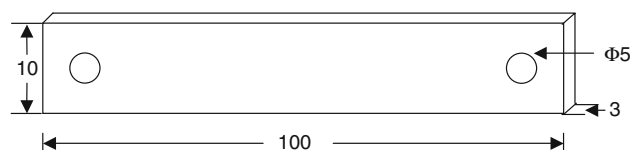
Geometry of the test sample. All dimensions are in millimeter
